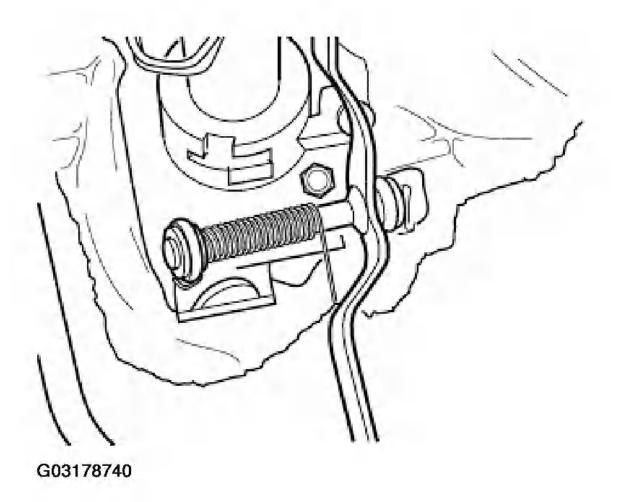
Checking Return Spring Installation Position Courtesy of BMW OF NORTH AMERICA, INC.
